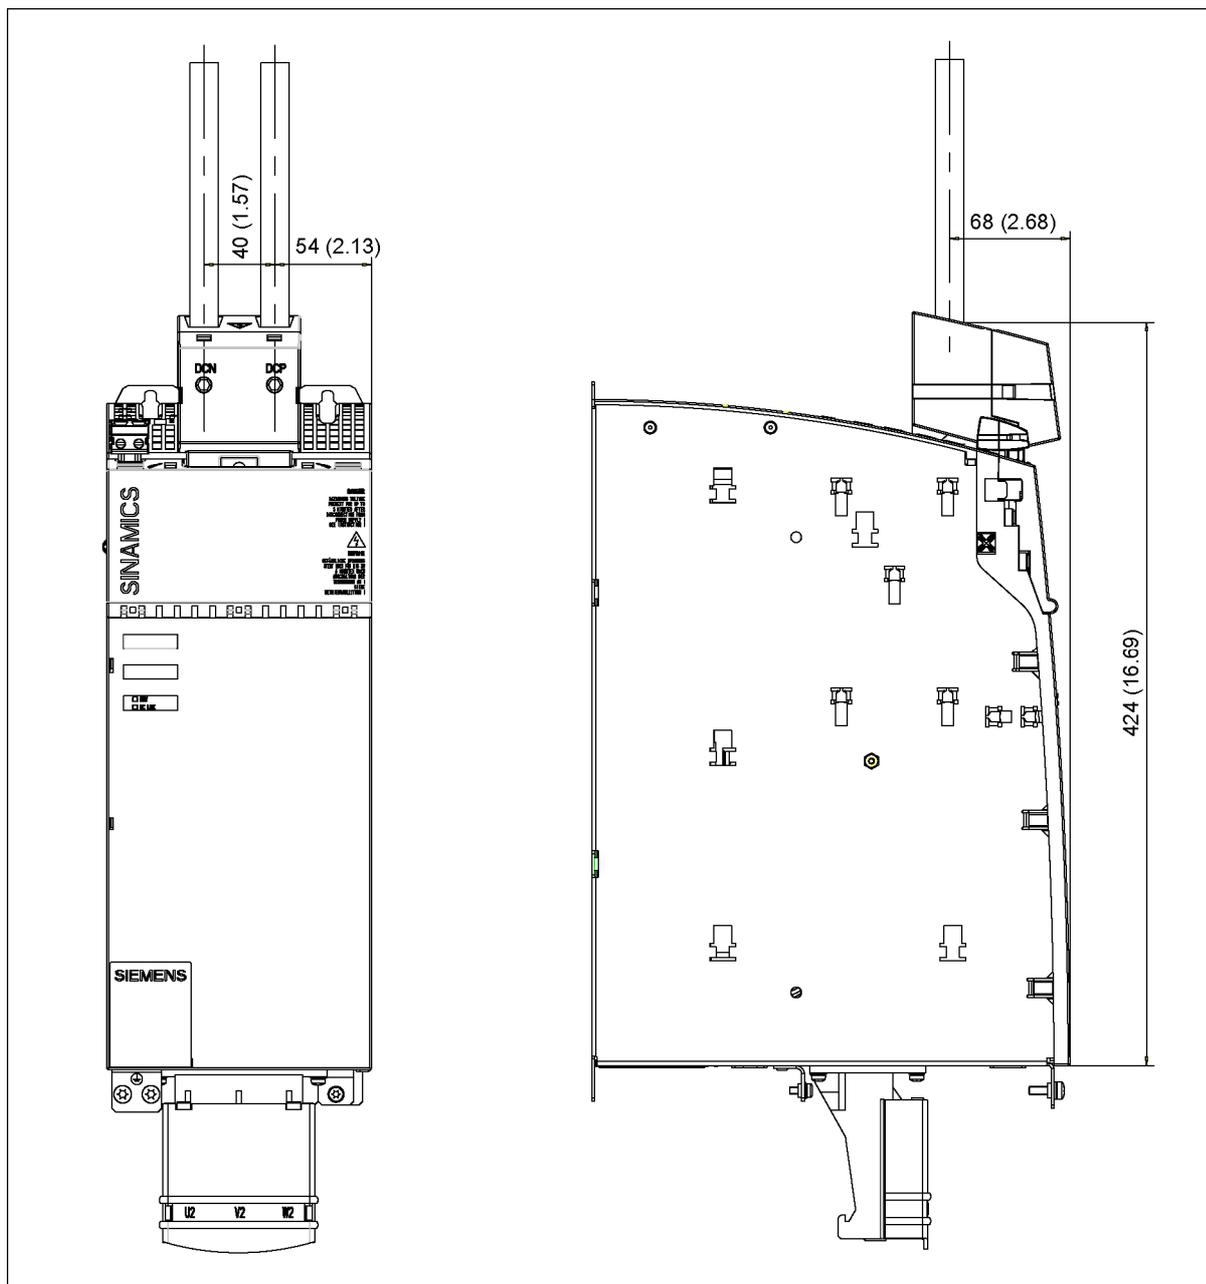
Dimension drawing of 150 mm component with DC link rectifier adapter for 35 mm² to 95 mm², all dimensions in mm and (inch)
